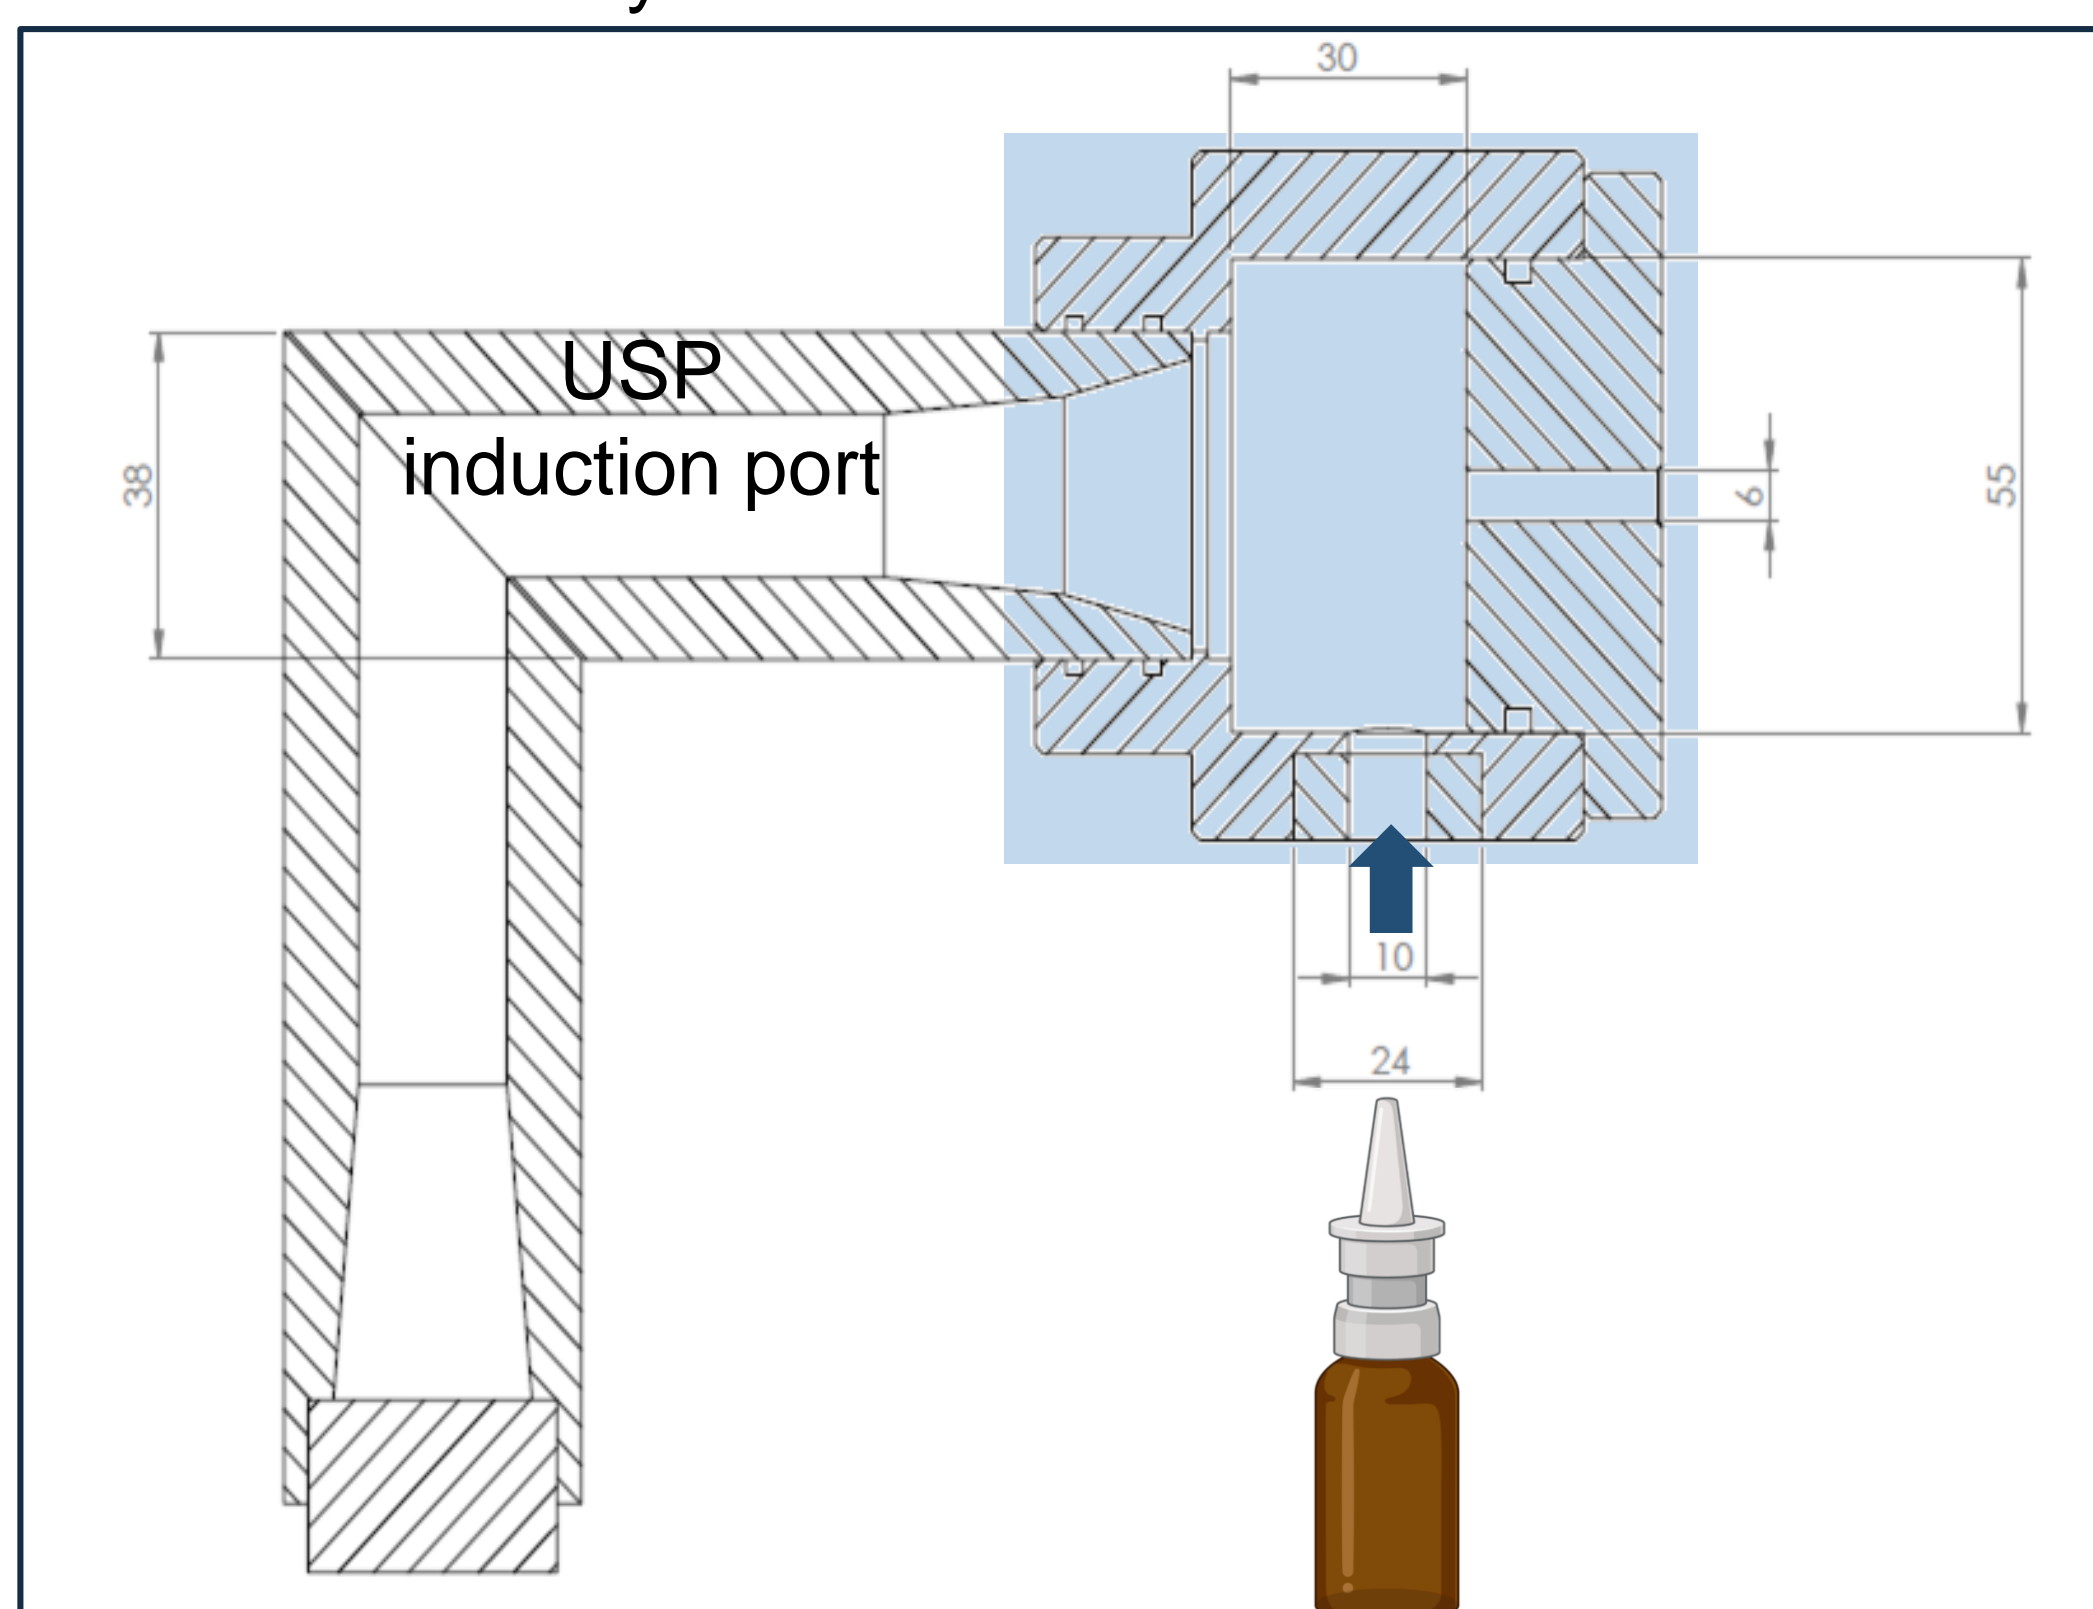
Technical drawing of the Kiel Nasal Inlet (blue) attached to USP throat. Side view. Nasal product inserted from below. Dimensions are given in mm.
